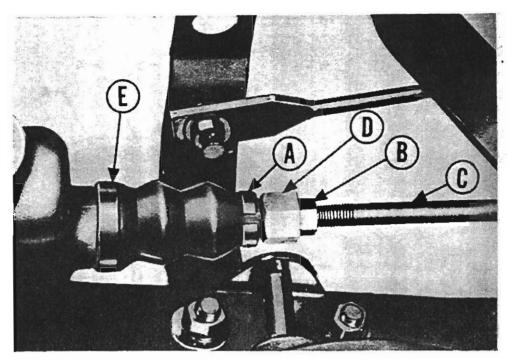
Showing Parts Affecting Adjustment of Brake Pedal Free Play.
